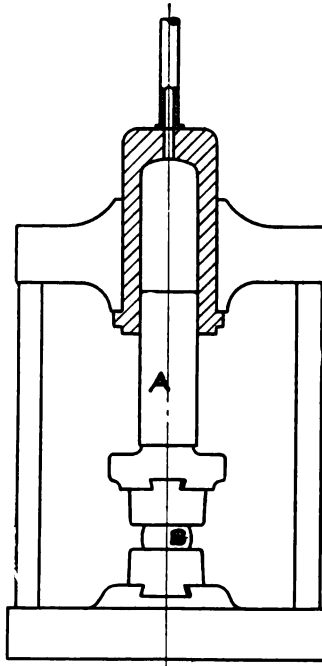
SIMPLE TYPE OF FORGING PRESS
